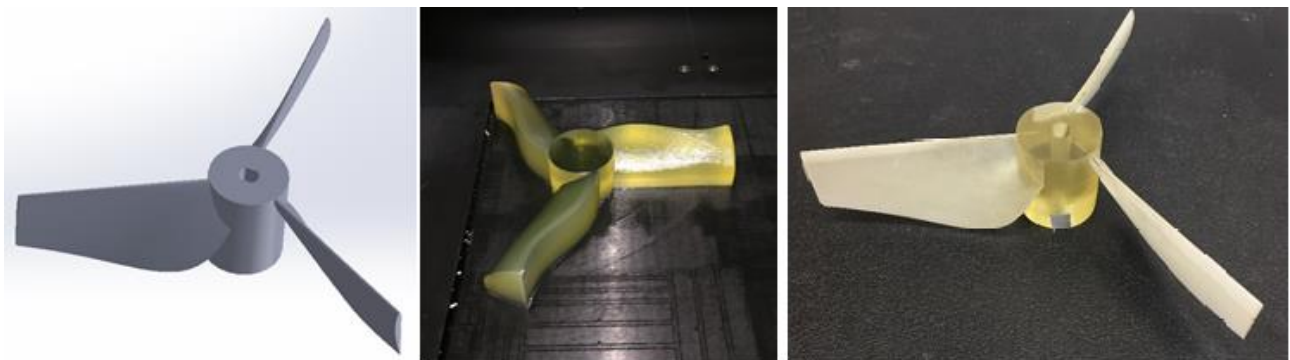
Additive manufacturing of the rotor of a small scale wind generator: body model, printed part on the tray at the end of manufacturing still surrounded by support material, after cleaning
